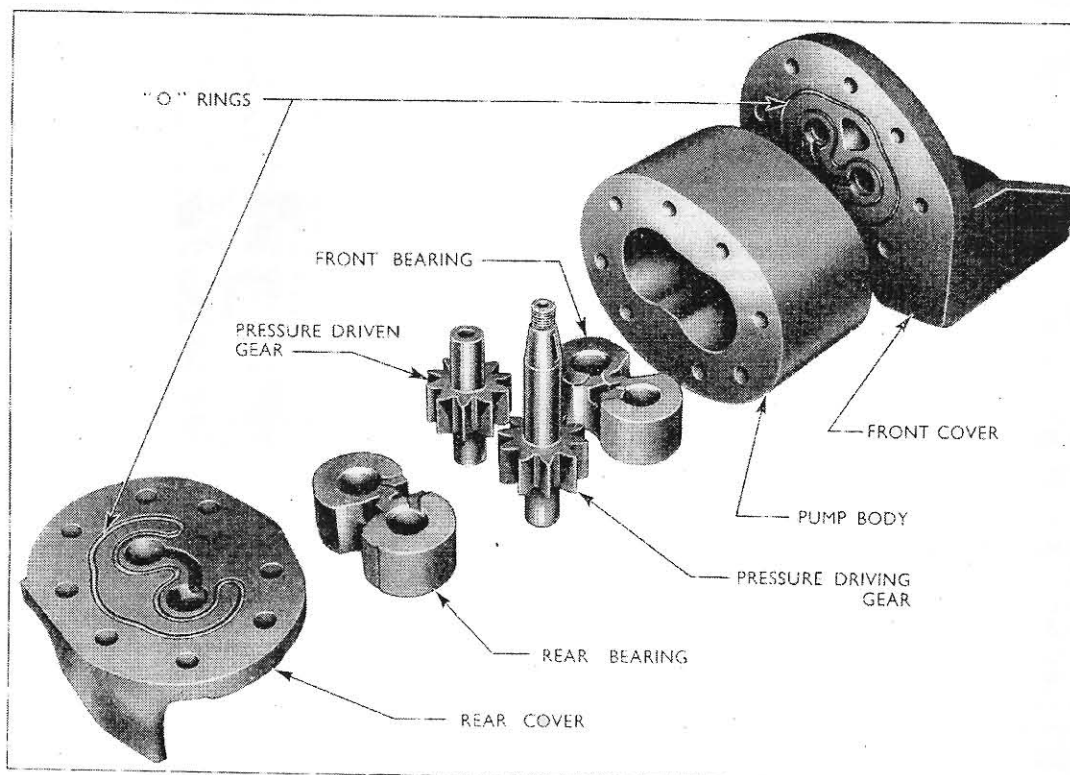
Hydraulic Pump Body, Gears and Bearings
